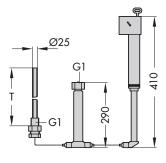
Dimensions in mm \cdot Valve and thermostats \cdot See Table 3
